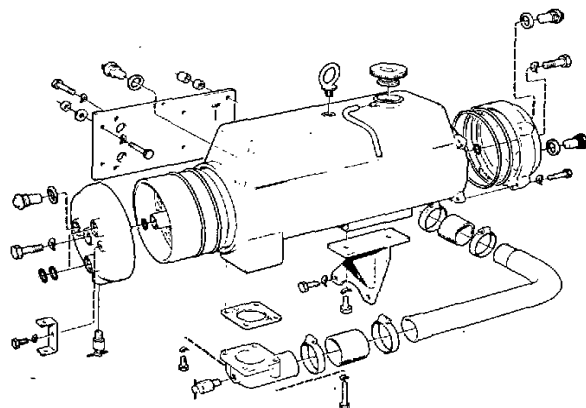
Tubular heat exchanger, MD70, TMD70, TAMD70
